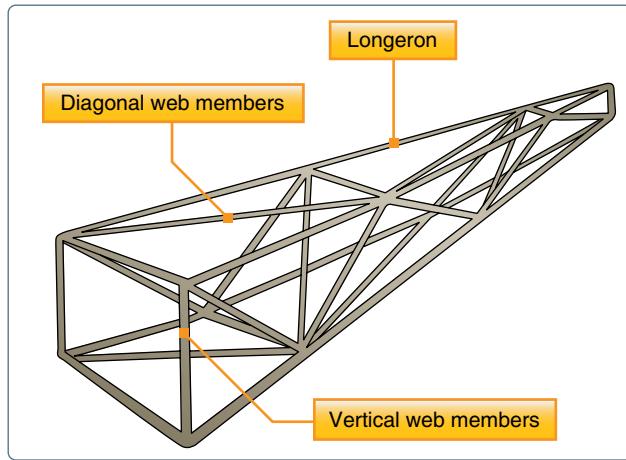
A truss-type fuselage. A Warren truss uses mostly diagonal bracing.
